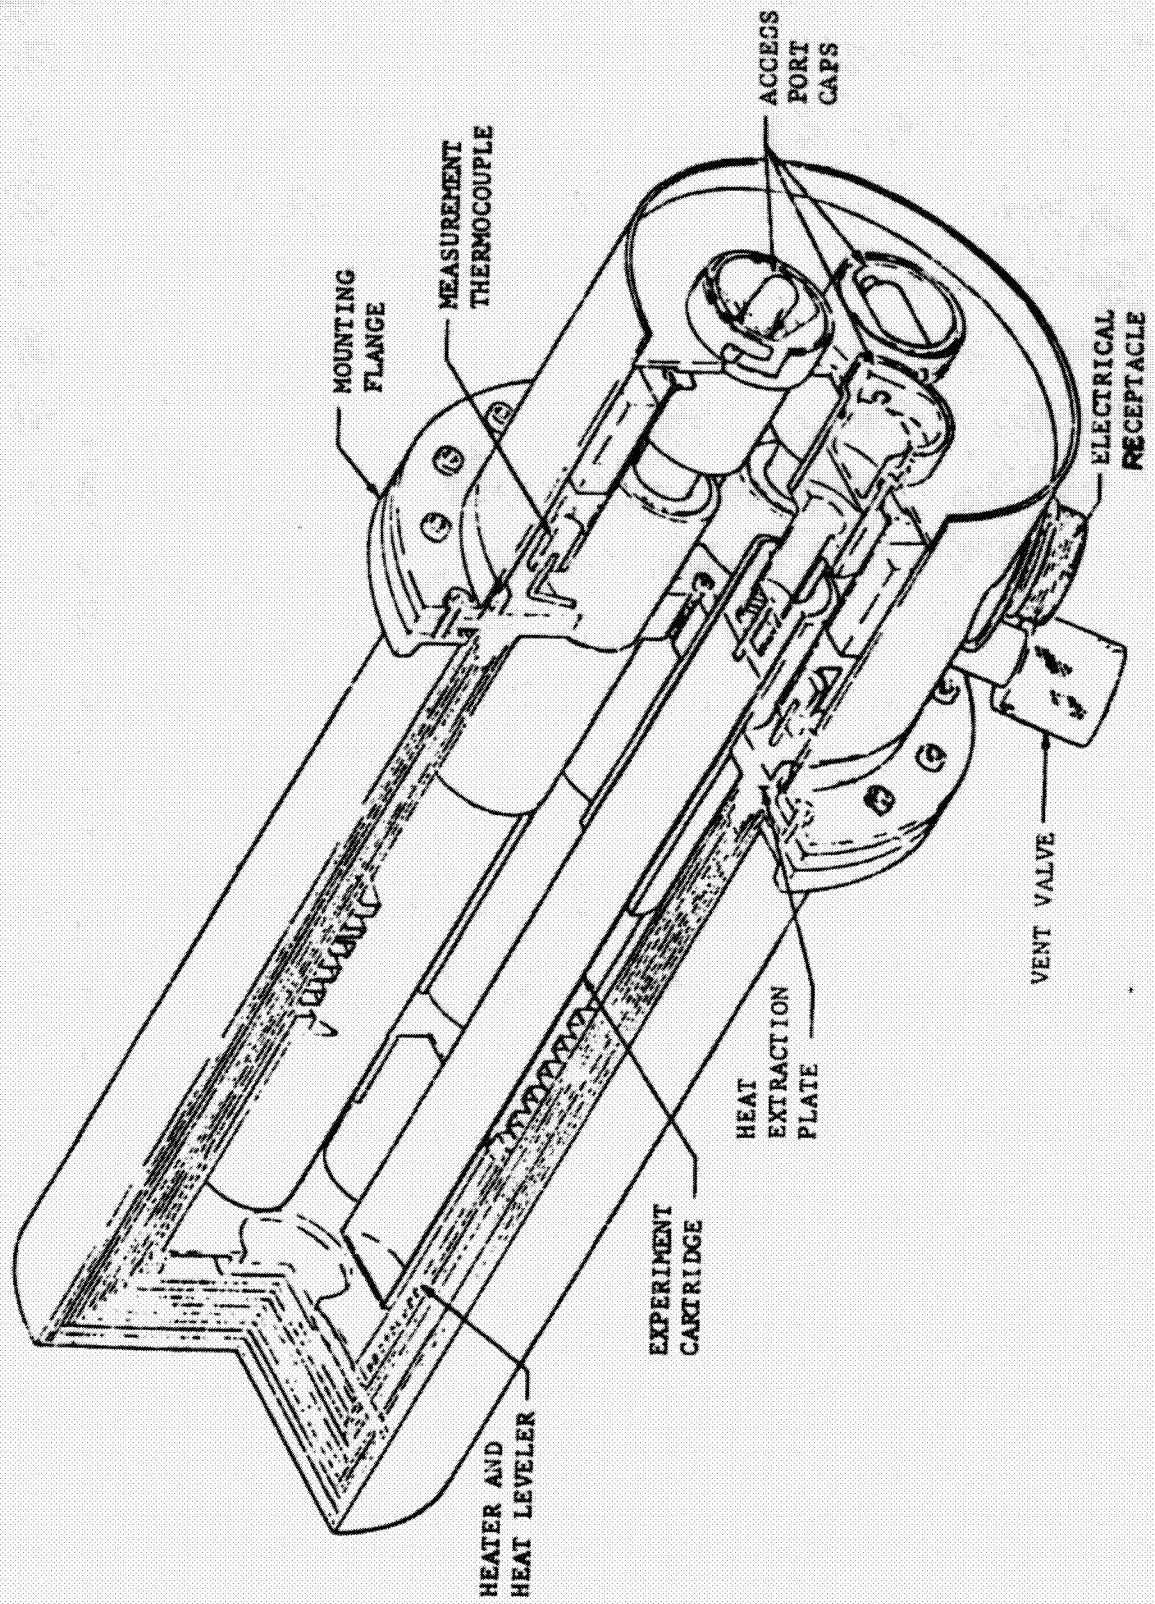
CUTAWAY VIEW OF MULTIPURPOSE ELECTRIC FURNACE
